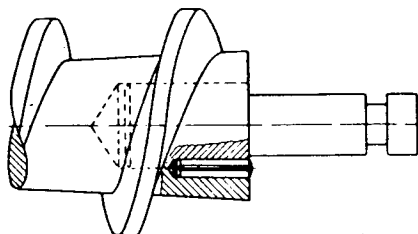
Use as round wedge for fastening a screw conveyor to a shaft end
